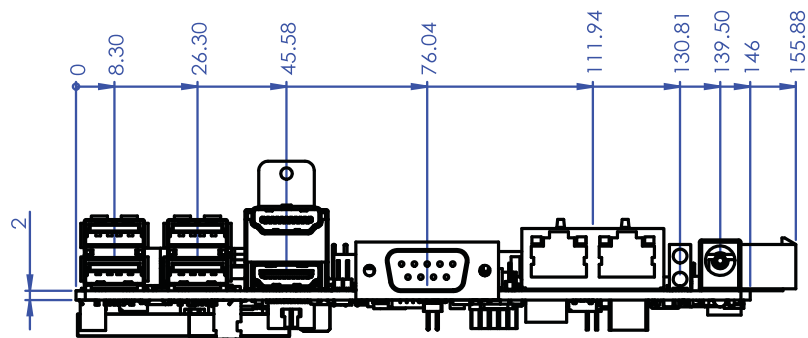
MIO-5391 Mechanical Drawing (Coastline)
